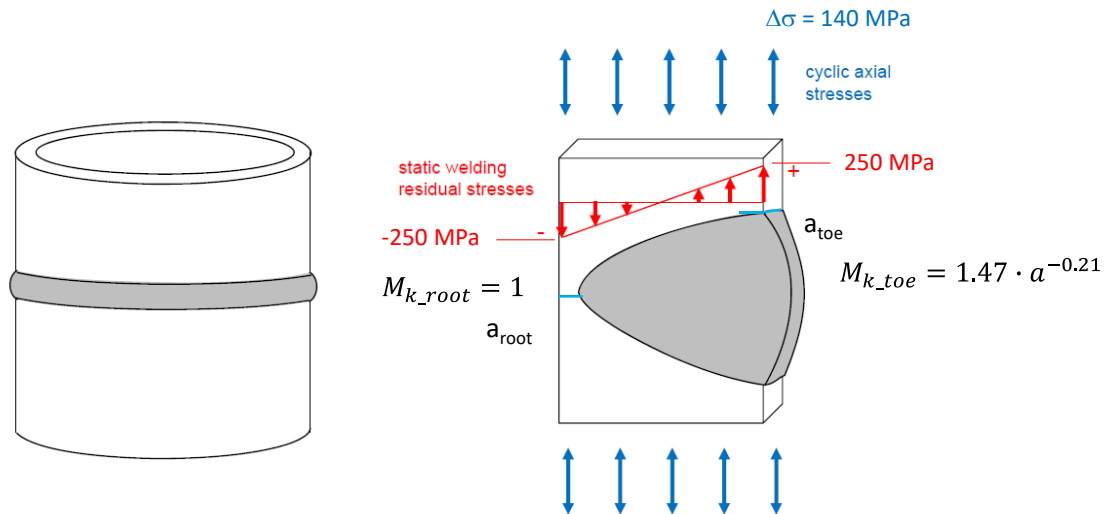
Butt welded pipe connection with 10 mm wall thickness
